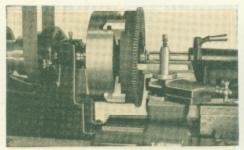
Removing Teeth from Flywheel, in One Cut, for New Ring Gear
